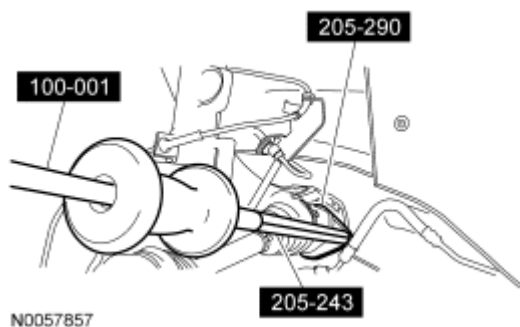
Separating LH Halfshaft From Transaxle Using Special Tools (100-001), (205-243) &
